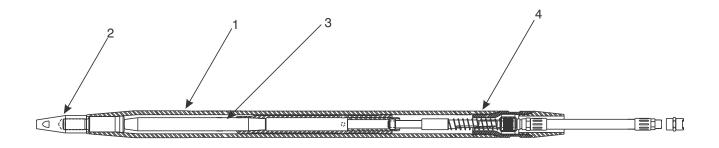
Model 310-TH Hole-Hog Complete Assembly Serial Number 500 thru 649
